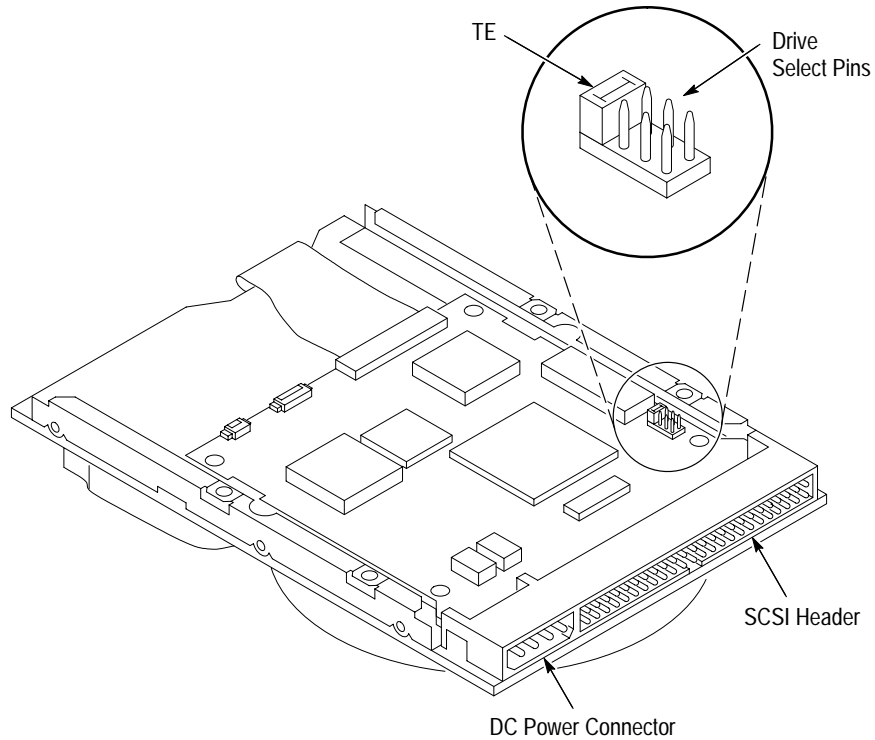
Jumper Locations on the 1.2 Gbyte Hard Disk Drive (Factory Settings Shown)
